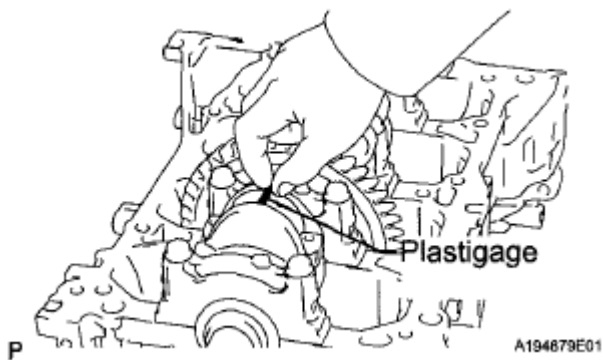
Laying Strip Of Plastigage On Crank Pin
